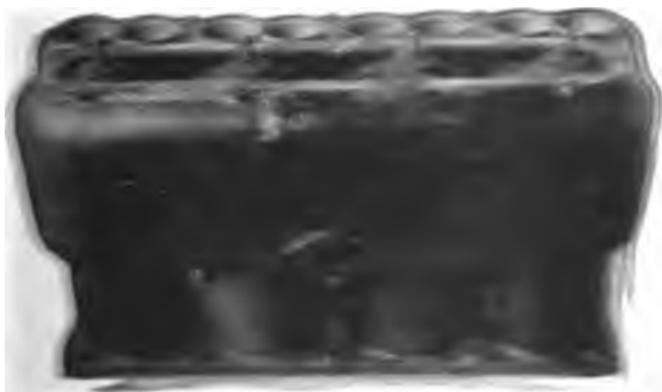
Cylinder Casting with jacket Broken and Cut Away
